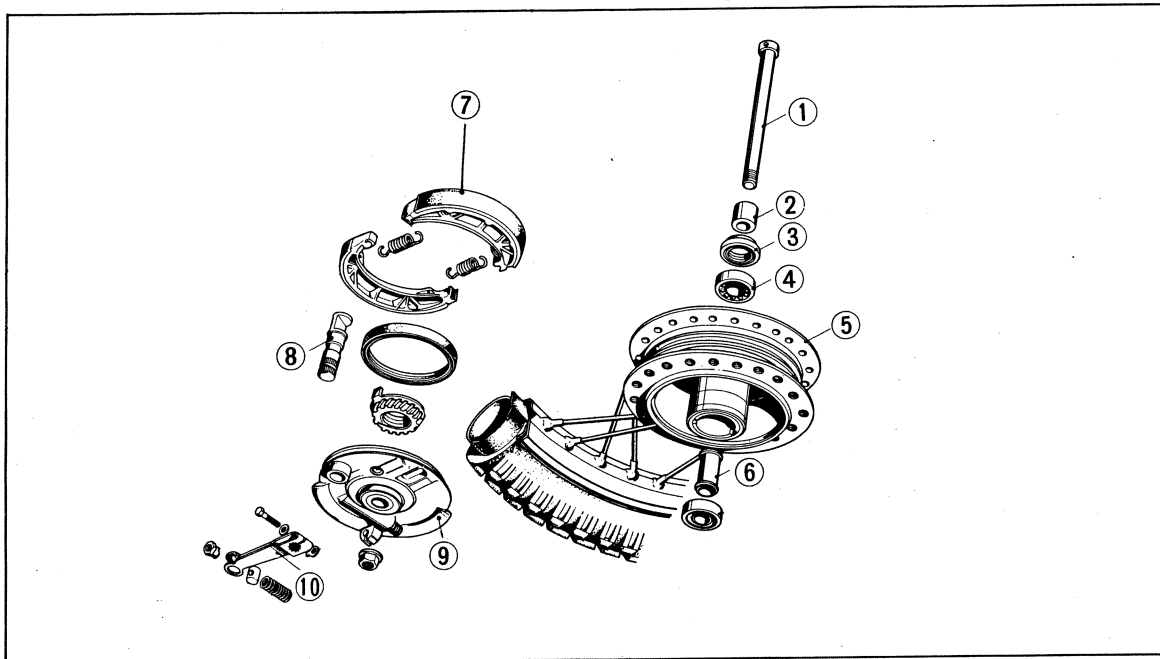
① Front wheel axle ② Front wheel side collar ③ 21×37×7 oil seal ④ 6301R ball bearing ⑤ Front wheel hub ⑥ Front axle distance collar ⑦ Brake shoe ⑧ Front brake cam ⑨ Front brake panel ⑩ Front brake arm
